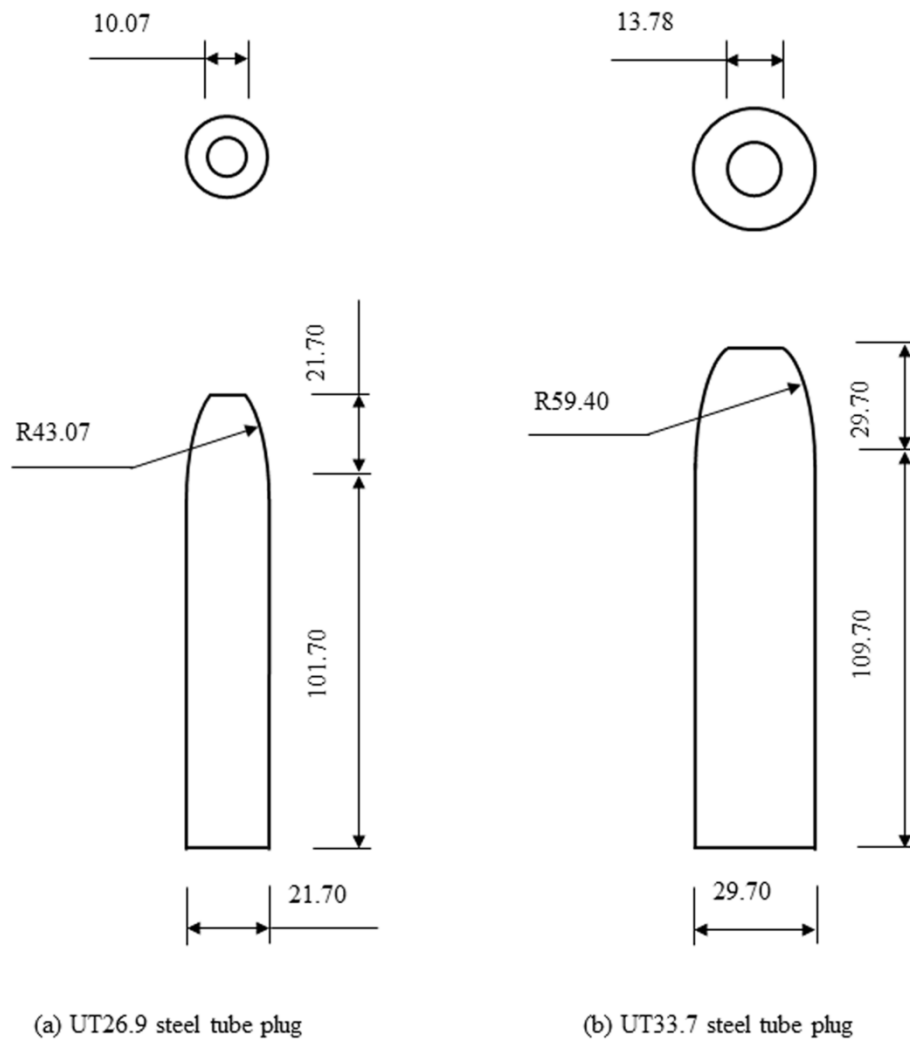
Metal plugs: (a) UT26.9 steel tube plug and (b) UT33.7 steel tube plug
